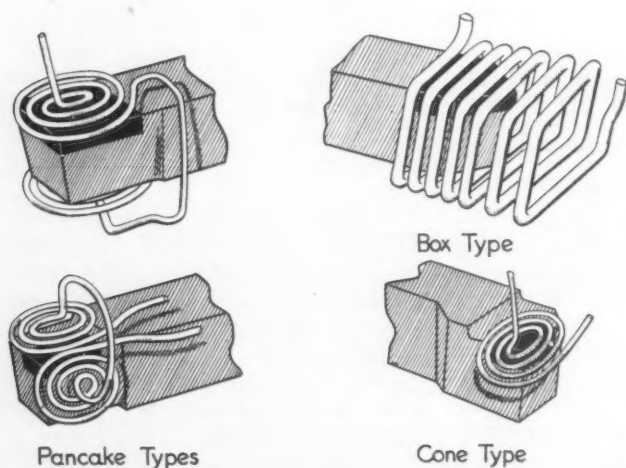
Sketches of typical coils, illustrating the variety of different designs which may be applied to the electron-tube induction brazing of carbide tools.
